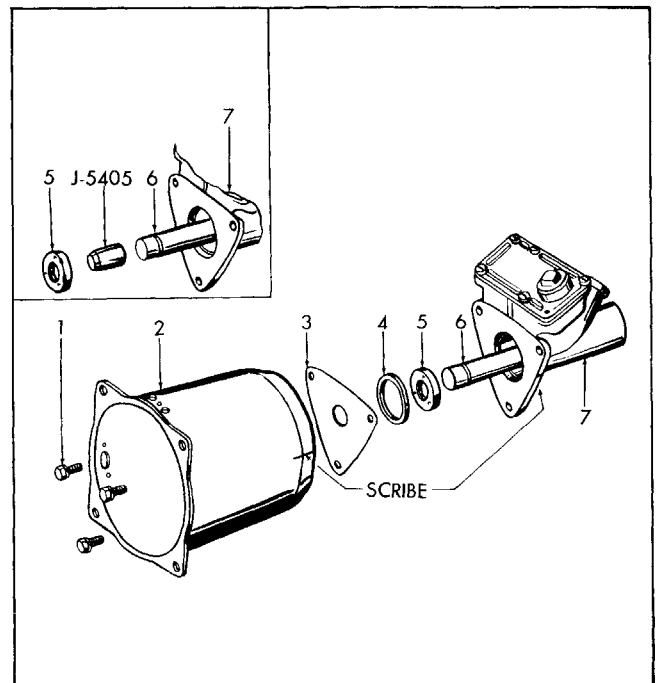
Assembly of Vacuum Cylinder to Hydraulic Cylinder
